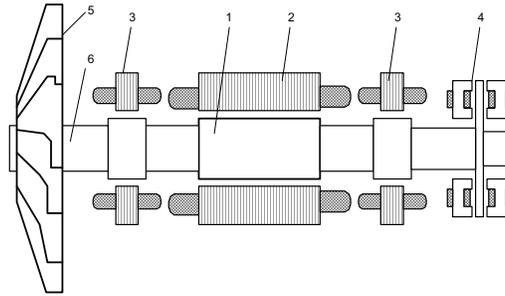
Centrifugal chiller compressor with high speed PM brushless motor and magnetic bearings: 1 — rotor with surface PMs and nonmagnetic can, 2 — stator, 3 — radial magnetic bearing, 4 — axial magnetic bearing, 5 — impeller, 6 — shaft.
